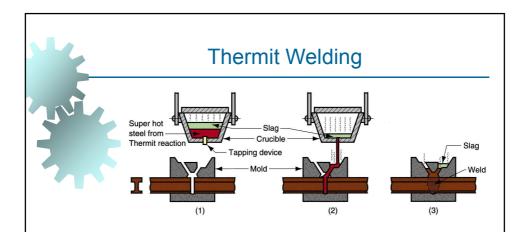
Thermit welding: (1) Thermit ignited; (2) crucible tapped, superheated metal flows into mold; (3) metal solidifies to produce weld joint.
